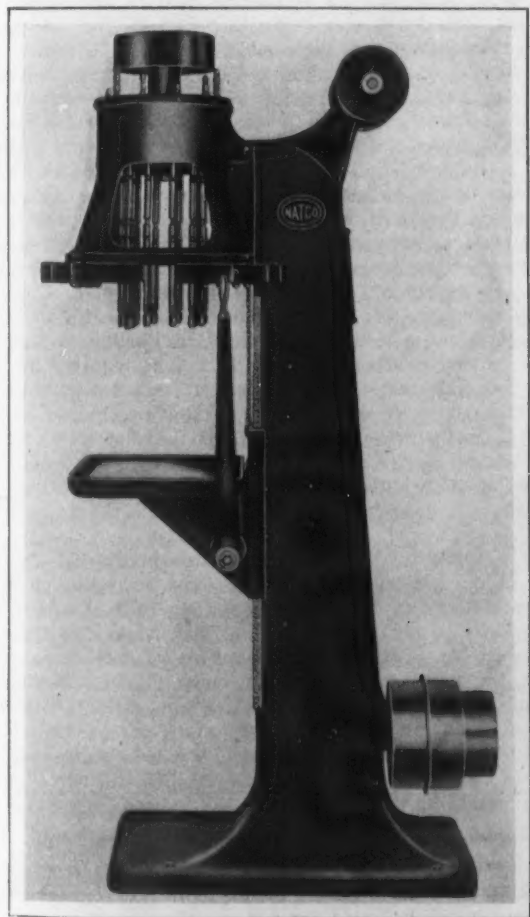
The Type M-1 Multiple-Spindle Drilling Machine with Independently Adjustable Spindle Speeds Built by the National Automatic Tool Company, Richmond, Ind.
